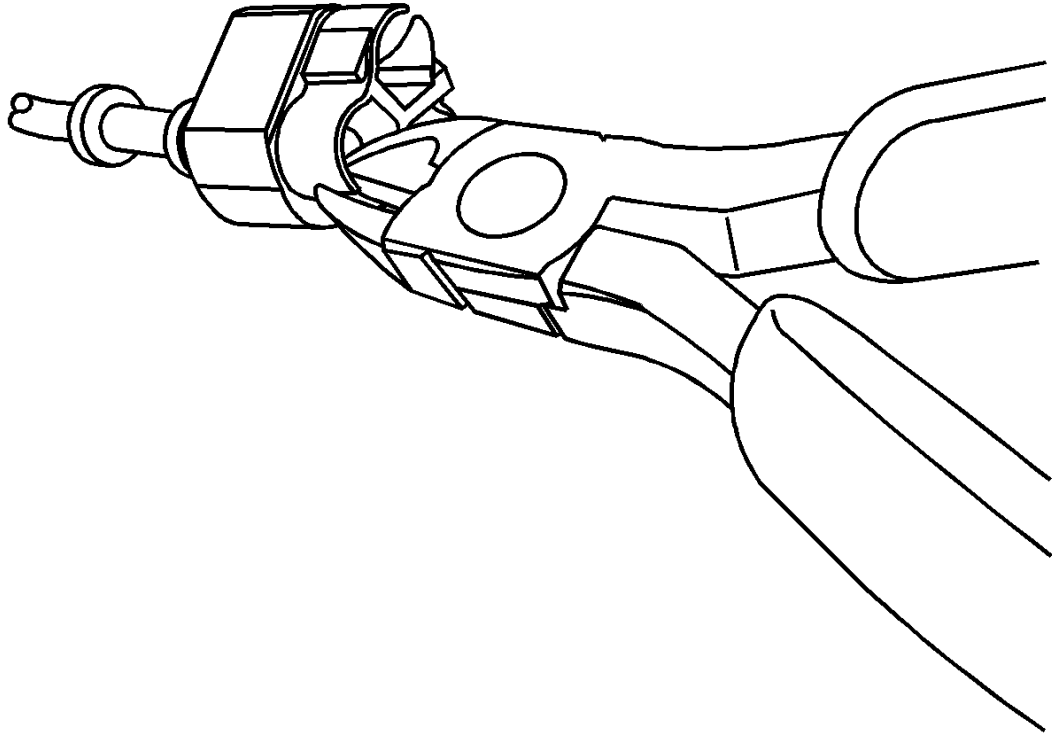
Using Side/Diagonal Cutters To Nip And Break Away Connector Housing
